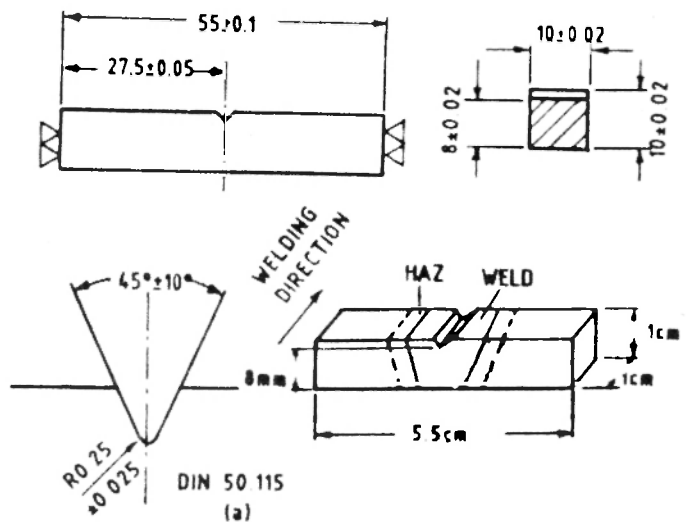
Dimensions (a) and Location (b) of Charpy V-Notch specimen.
